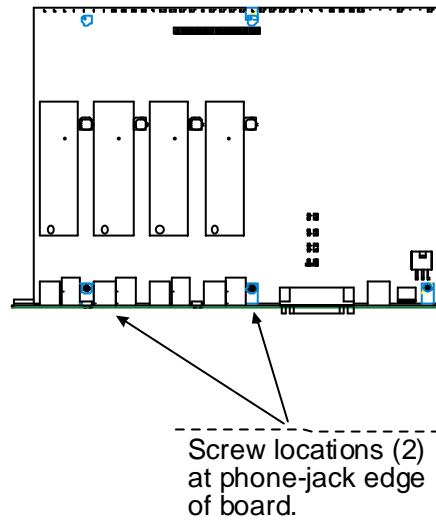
Screws to be removed and replaced with standoffs (phone-jack edge of board; top view)
